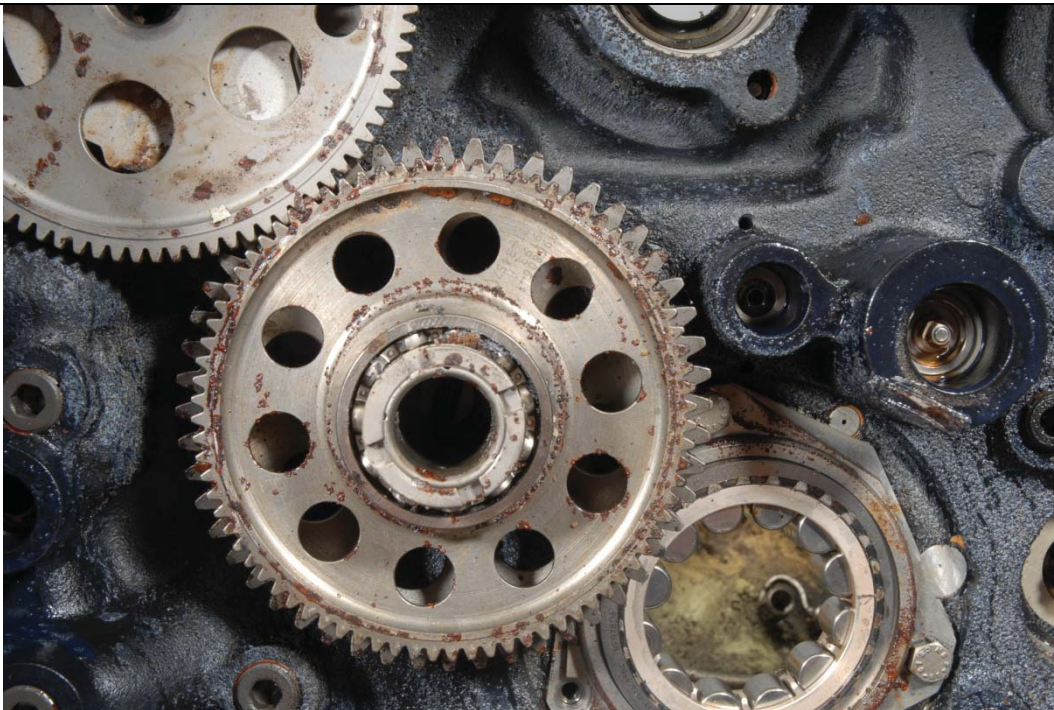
P-79297C, Third DDFC Gear, FLA
